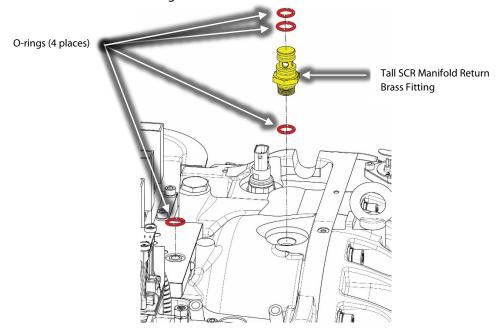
Tall SCR Manifold Return Brass Fitting Removal for Option 1
